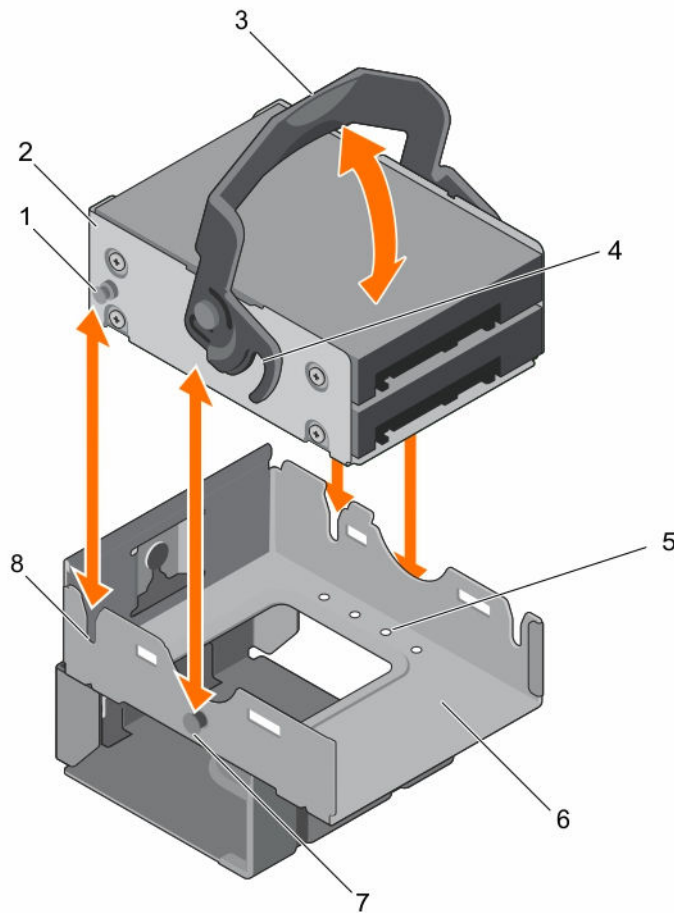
Removing and installing the 2.5 inch internal hard drive carrier
